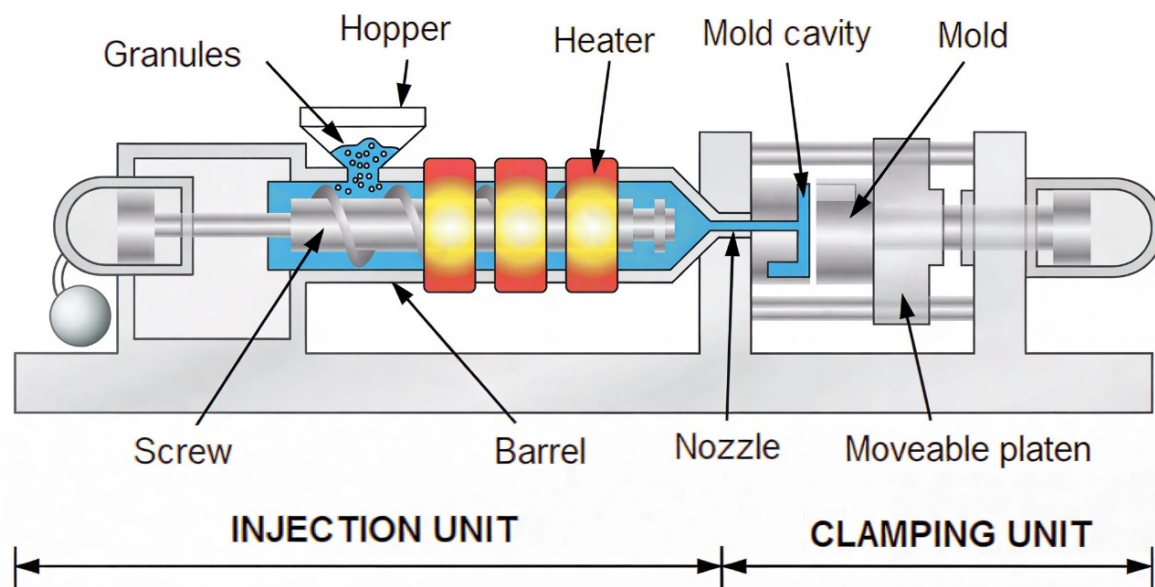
Illustration showing the operational layout and key functional units of an IM machine [6].
